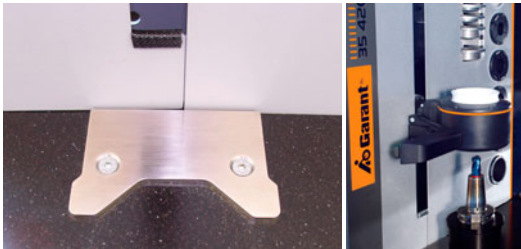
Positioning Vee block (left) and correctly positioned tool holder with chuck and tool (right).
